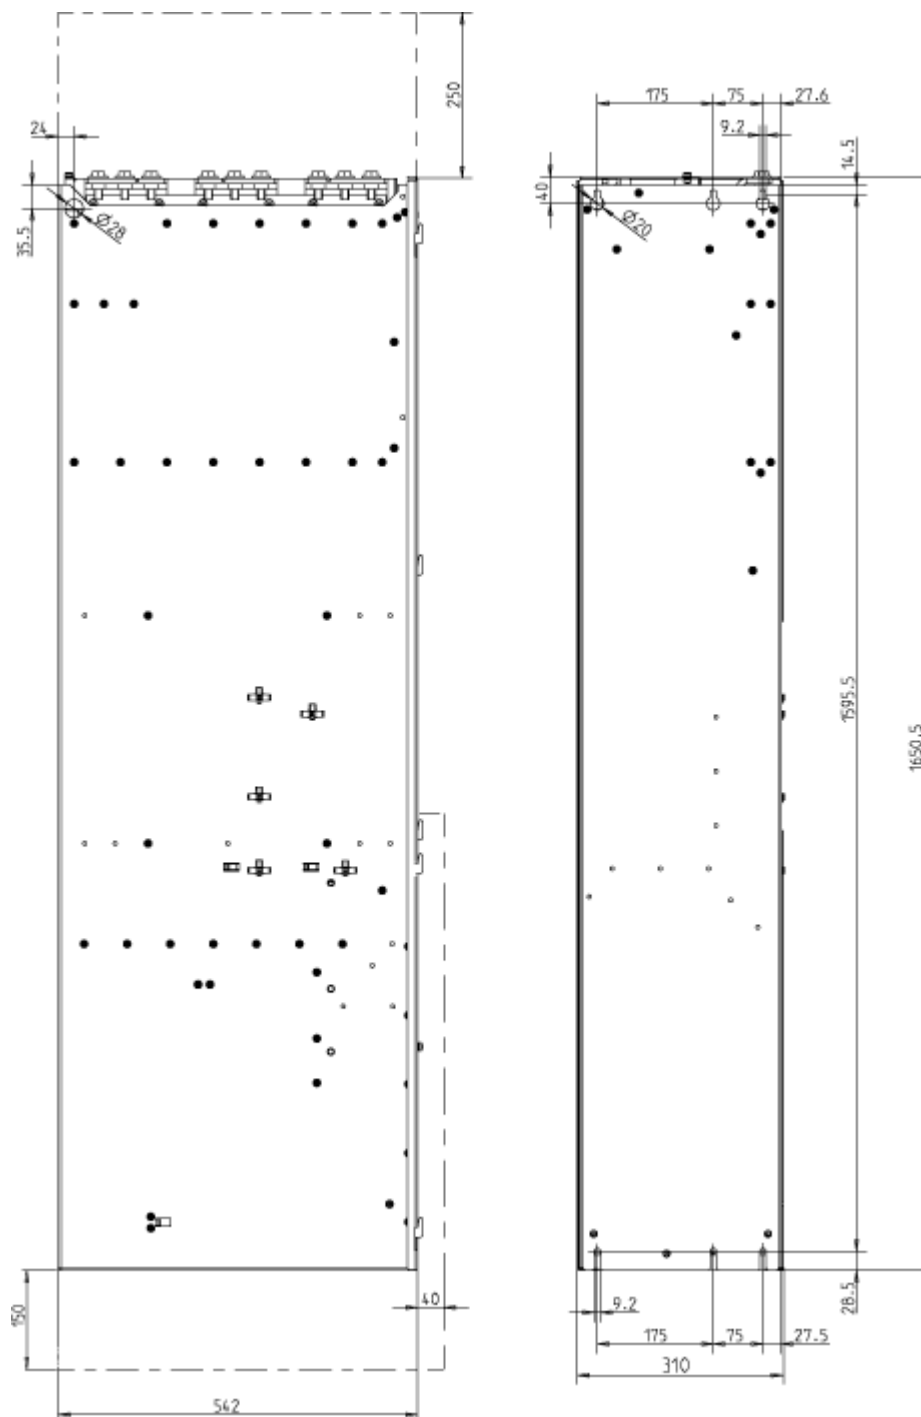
Dimension drawing, Basic Line Module, frame sizes GB, GD. Side view, rear view
